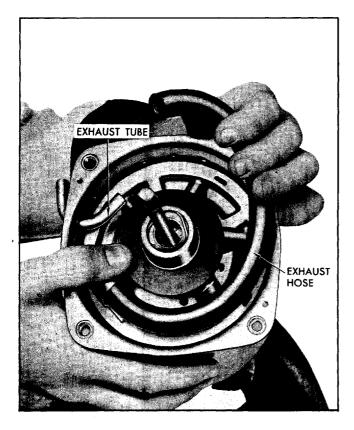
Removing or Replacing Exhaust Hose from Intake Tube
